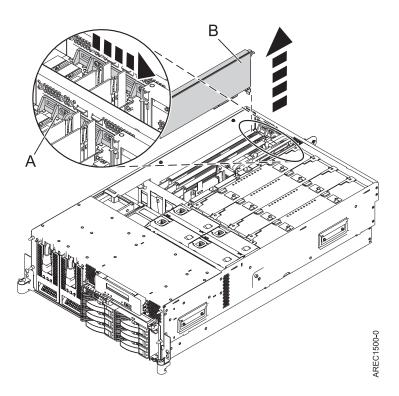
PCI adapter or filler plate removed from the rack-mounted system unit
